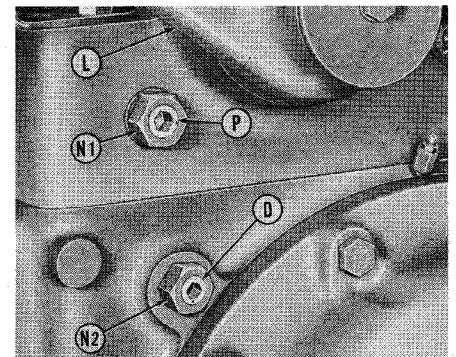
View showing location of position control eccentric pin (P) and draft control eccentric pin (D) at right rear corner of lift cover and rear axle center housing. Lift shaft arm is (L).
